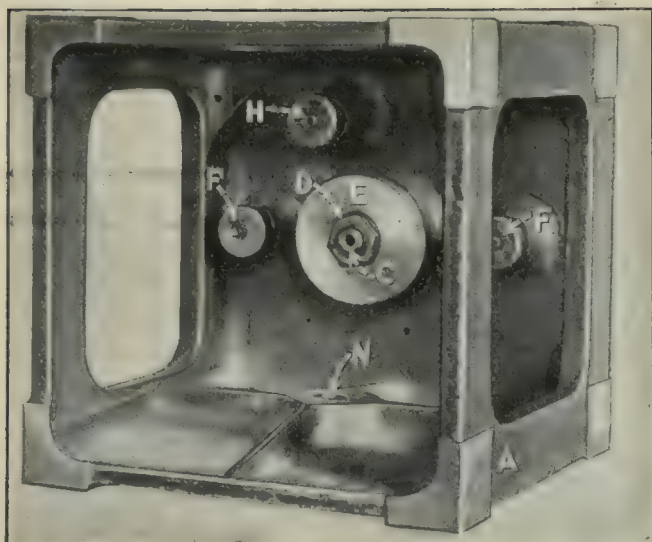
BACK OF ANGLE-MEASURING FIXTURE
